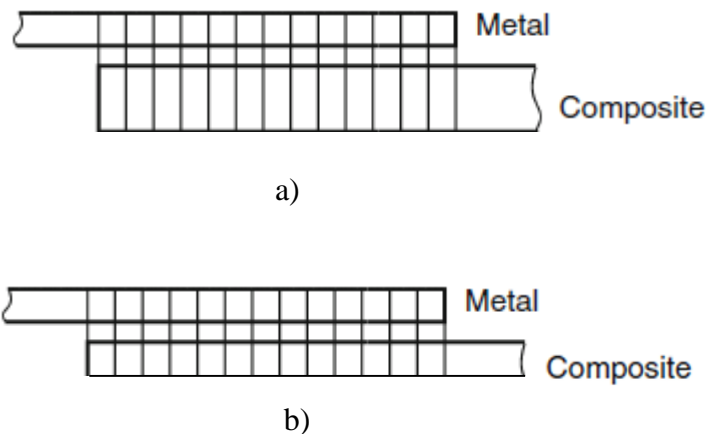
Dissimilar bonded joints: a) stiffness balanced joints, b) geometrical balanced joints
